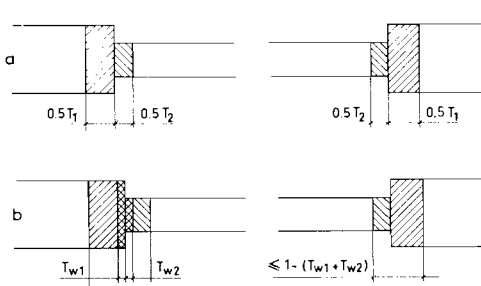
Contact fit A (see text) for two groups of equipments of dimensions with tolerances: (a), without and (b) with assembly tolerances.
